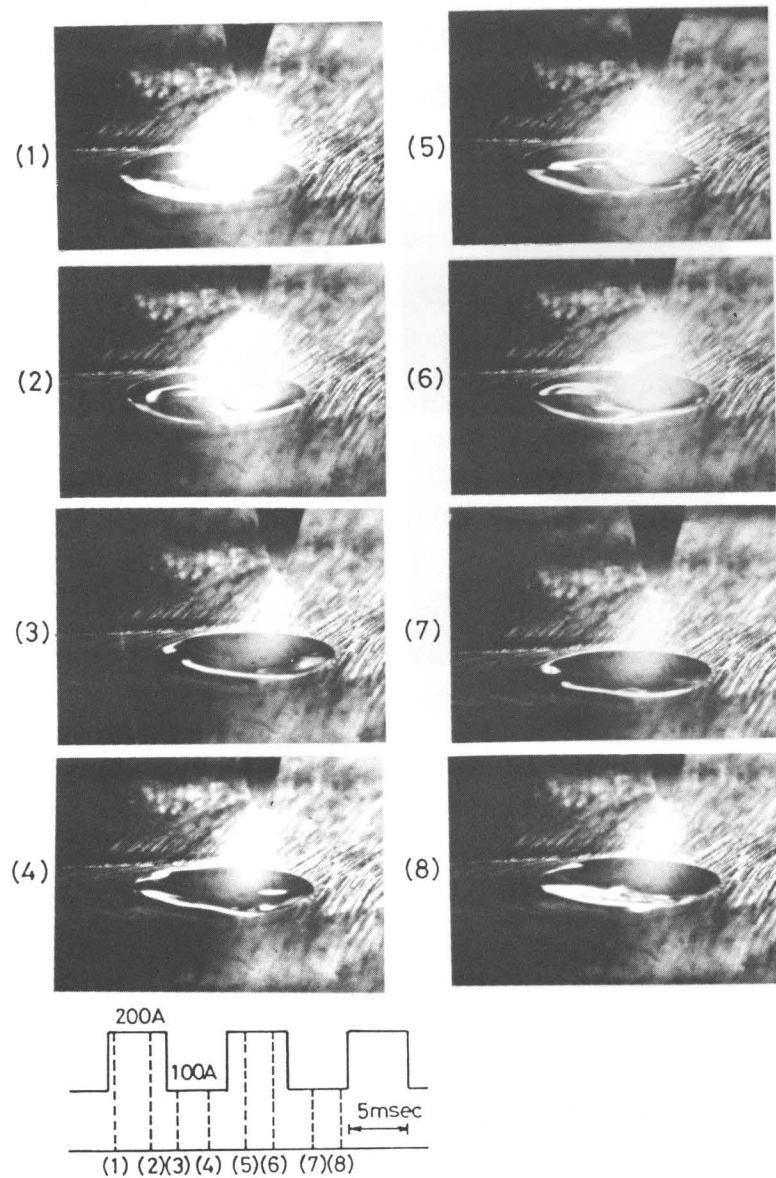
Typical frames picked up from high speed photography (410frames/sec) of weld pool behaviour in pulsed TIG welding. $I_{av}=150A$, $I_a=50A$, rectangular wave, $f=100Hz$, welding speed =10cm/min, arc length=3mm, vertex angle=30°, mild steel plate(SS41) 9mmt.
